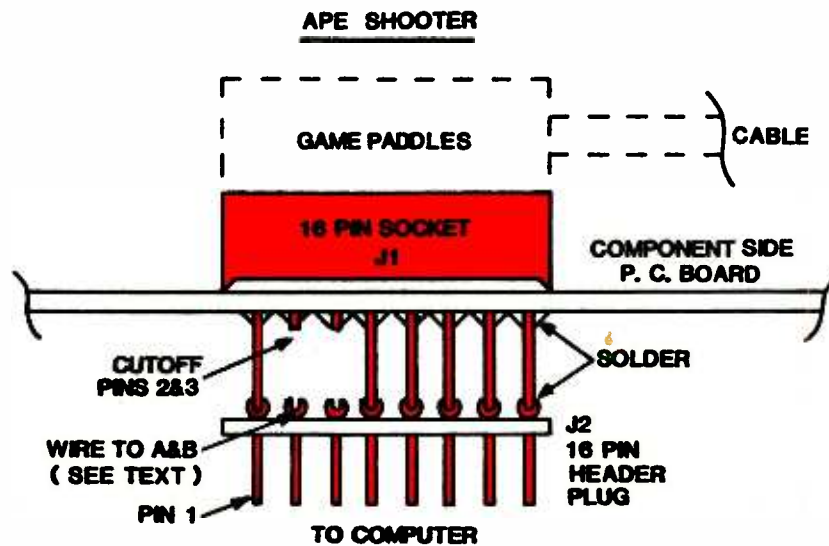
Here are the adaptor plug assembly details that are described in text.
